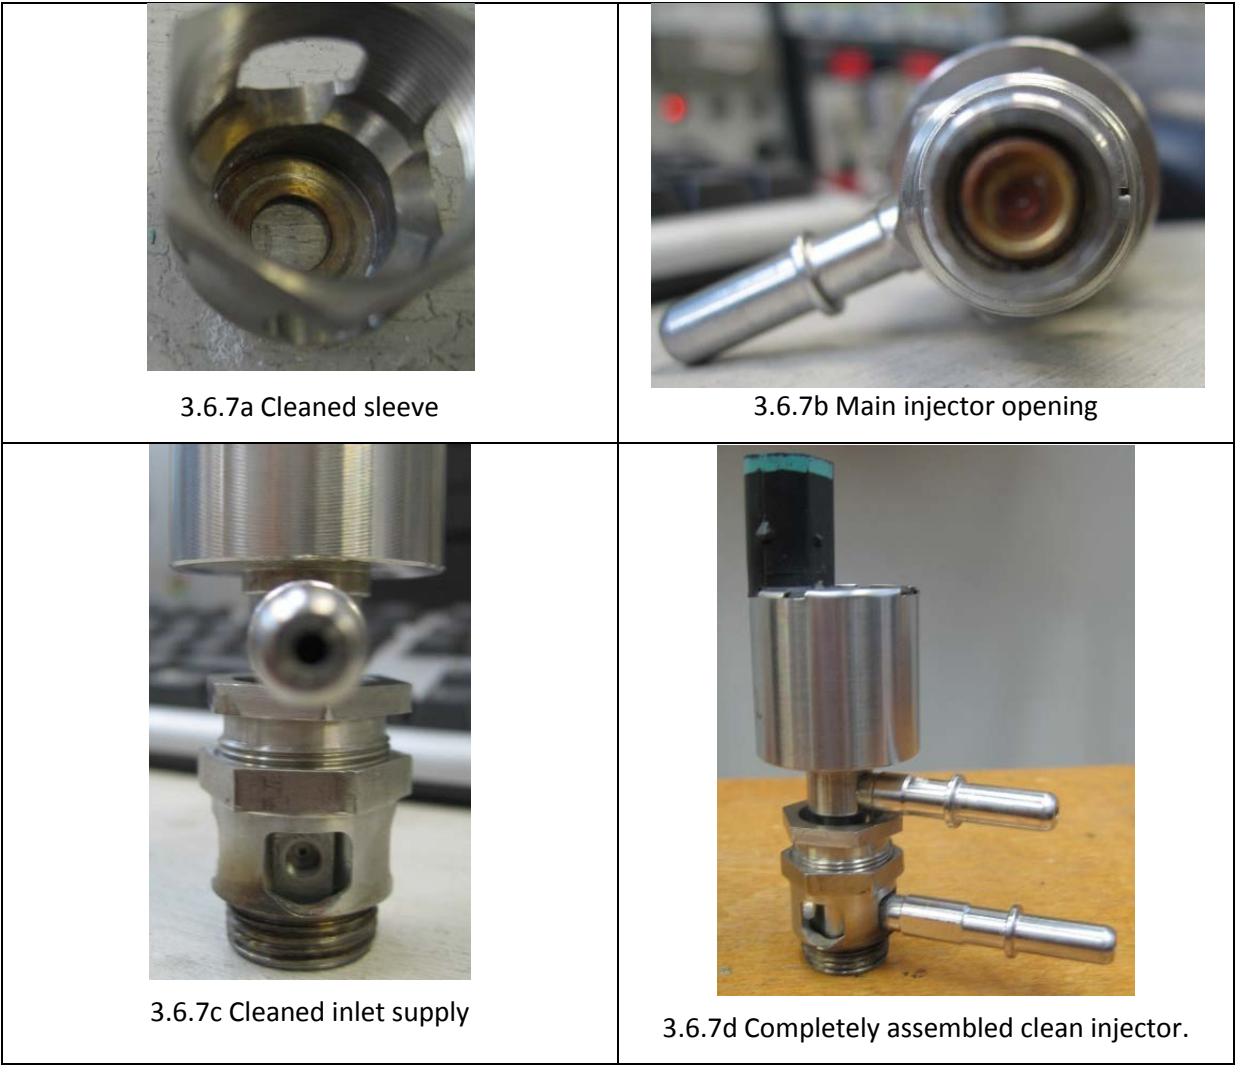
Final visual inspection of fully cleaned injector
